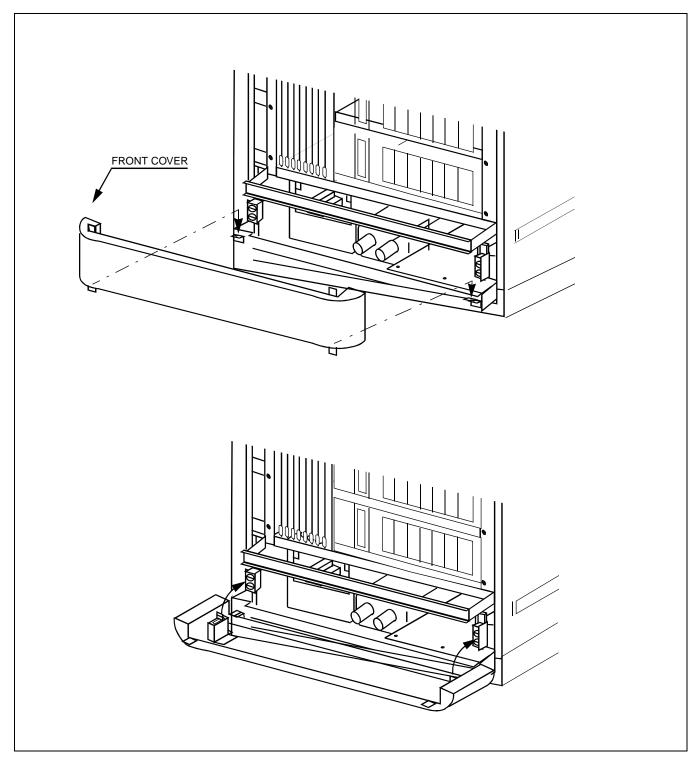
Front Cover Mounting Method (BASEU+LPR+PIM0)
